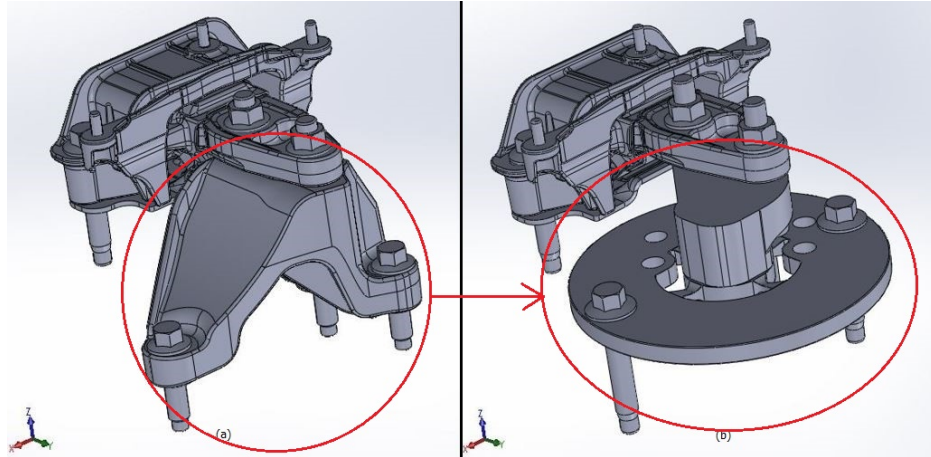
(a) Left Hand Side (LC1) engine mount is shown; (b) the bracket between the engine mount and the engine is replaced with the proposed load cell.
